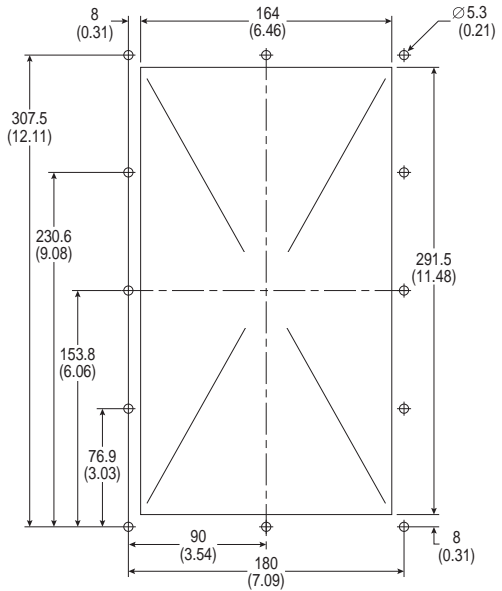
PowerFlex 400 Frame H Drive - Dimensions are in millimeters and (inches)
